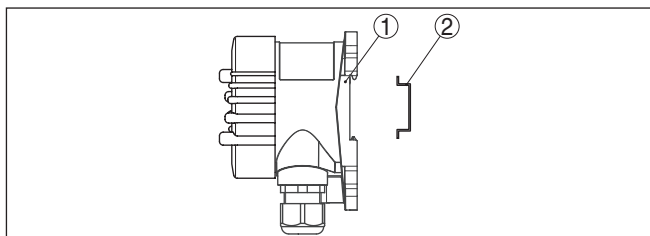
VEGABOX 03 with plastic housing for carrier rail mounting
